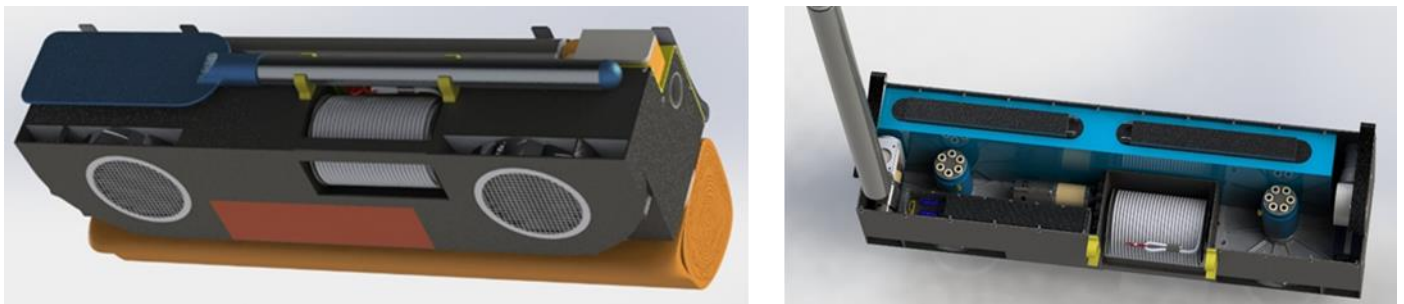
Boat bottom-rear view & Boat Internals (right)
